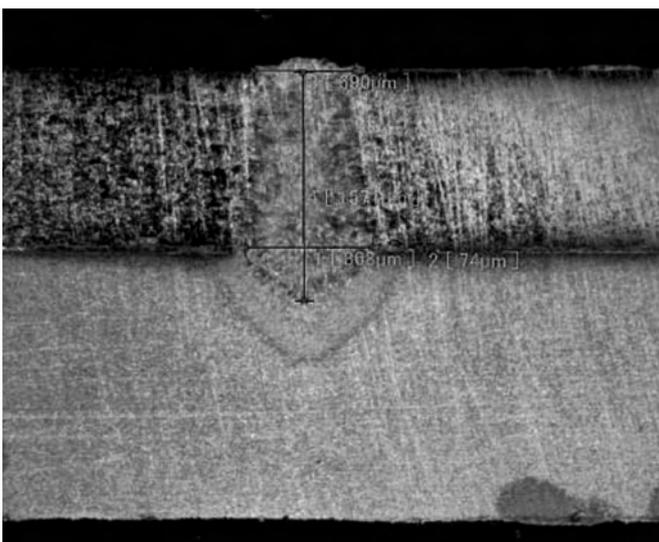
Picture of weld with spacer sheets, with 4 mm defocus.
